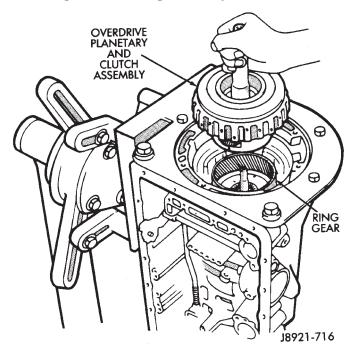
Installing Overdrive Planetary And Clutch Assembly
